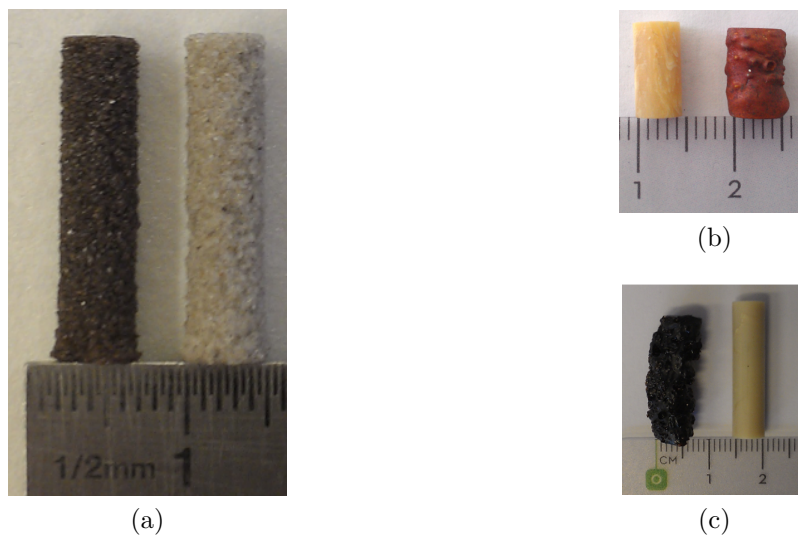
Dilatometry specimens (a) sand core specimen heated up to 450 °C (b) resin specimen heated up to 200 °C and (c) resin specimen heated up to 350 °C.
